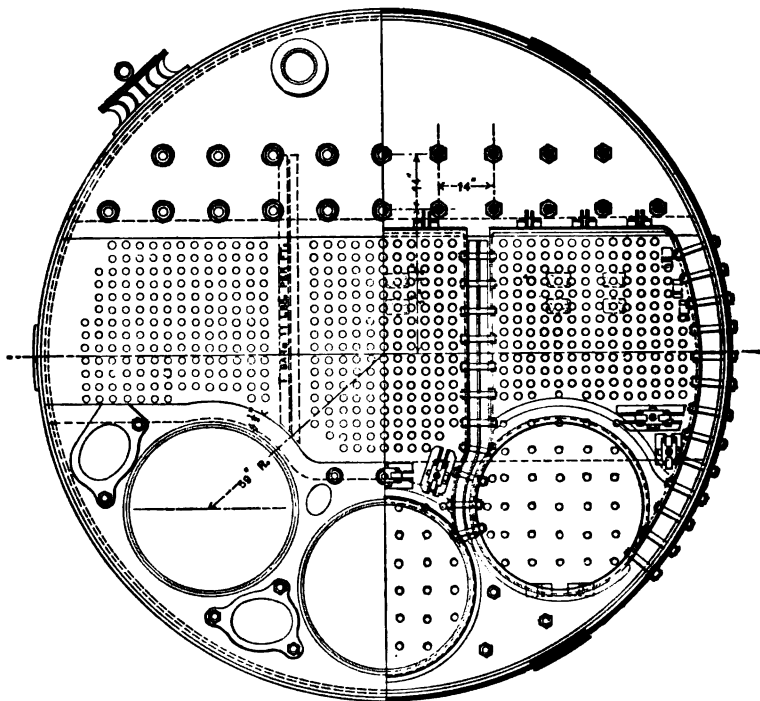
Scotch Boiler. End view and section of Fig. 22.
